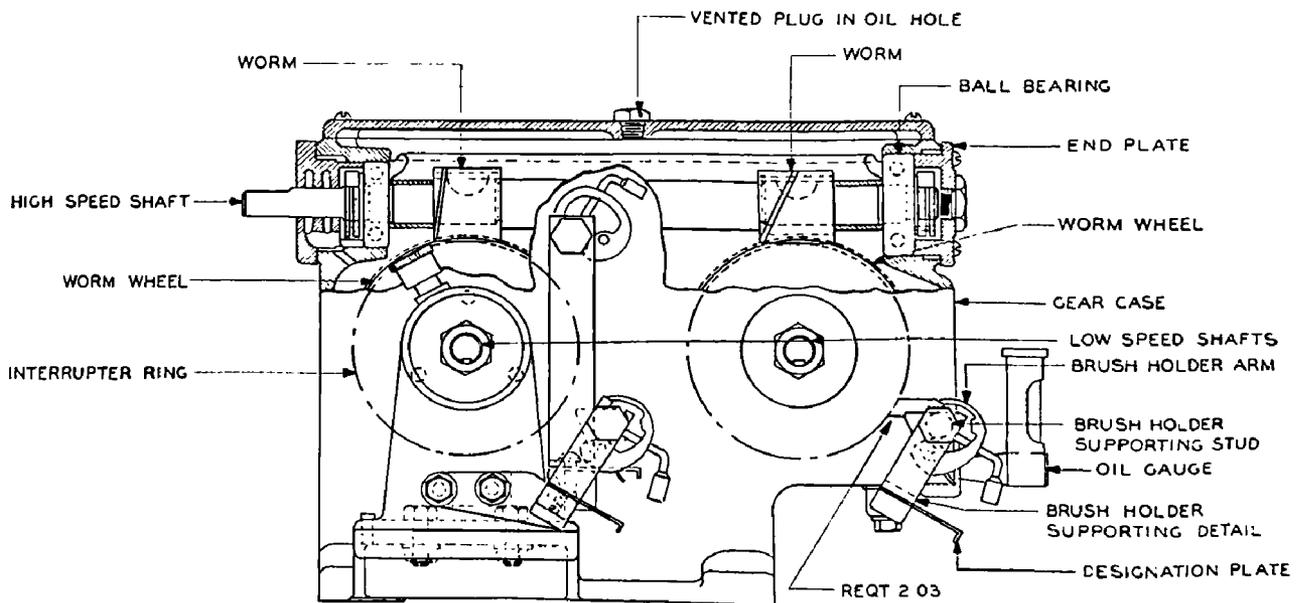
Side View of Interrupter Mounting (2C Interrupter Mounting Shown)
